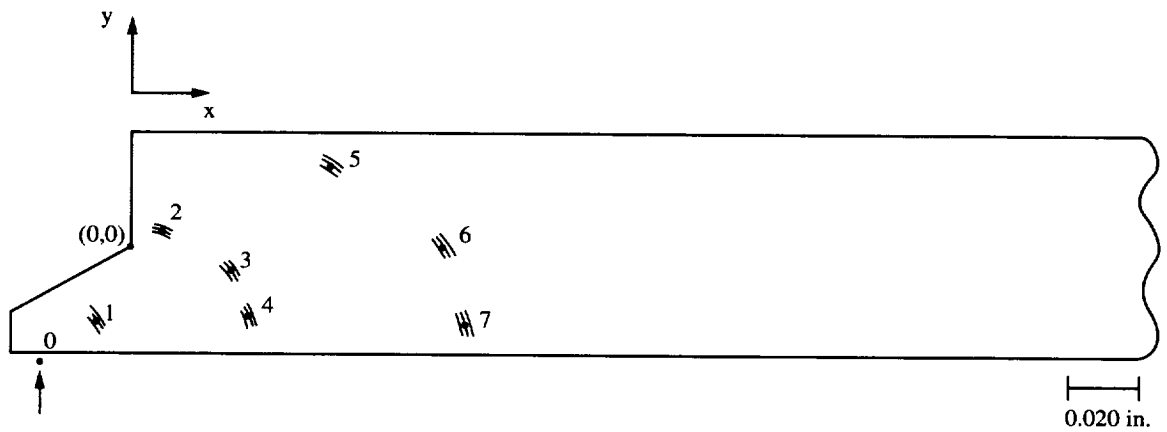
The schematic shows the initiation site, marker band and final crack front locations for the fatigue crack in rivet hole 4J7 that grew in the forward direction. Two sets of marker bands were found. The fatigue crack initiation region is marked with an arrow. The table summarizes the X-Y marker band coordinates relative to the origin (0,0), and the cycle count for each set of marker bands.
